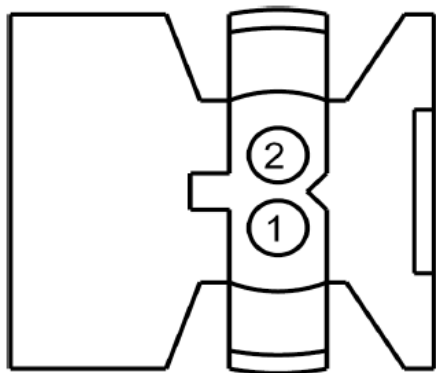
Passenger Side Front Seat Control Switch Connector End View (C3190)
